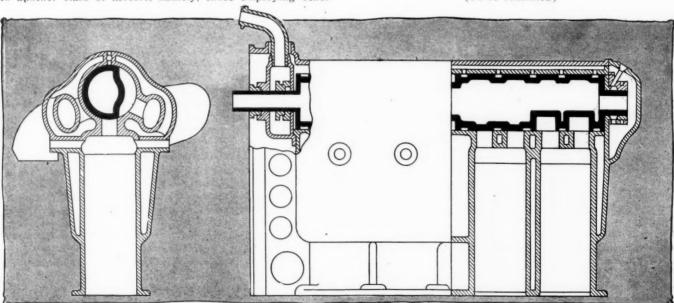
Walker rotary-valve motor in which the intake gases are drawn through the valve for cooling
